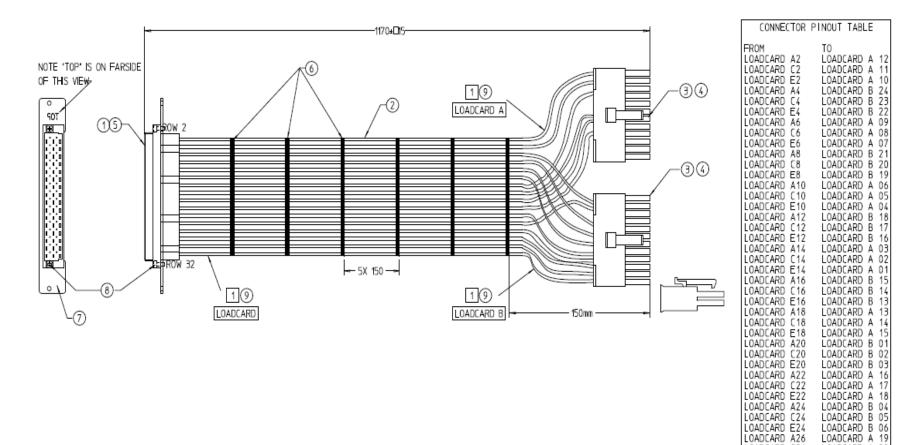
E6170-61605 Cable for Load card to Express Connect. This cable can be used for E6175A, E6177B and N9377A
